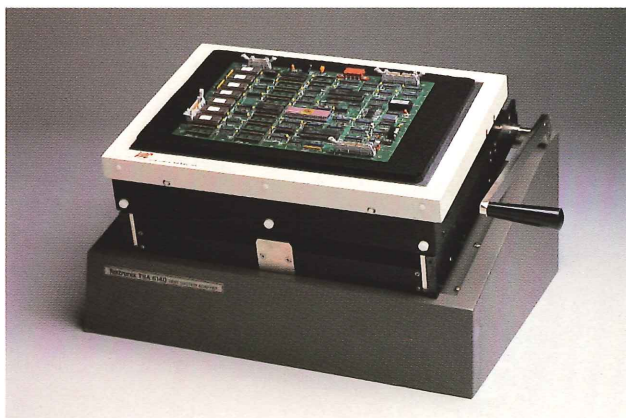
Virginia Panel Corporation's general-purpose panel, part of a complete line of vacuum-operated bed-of-nails, ECB test heads.
